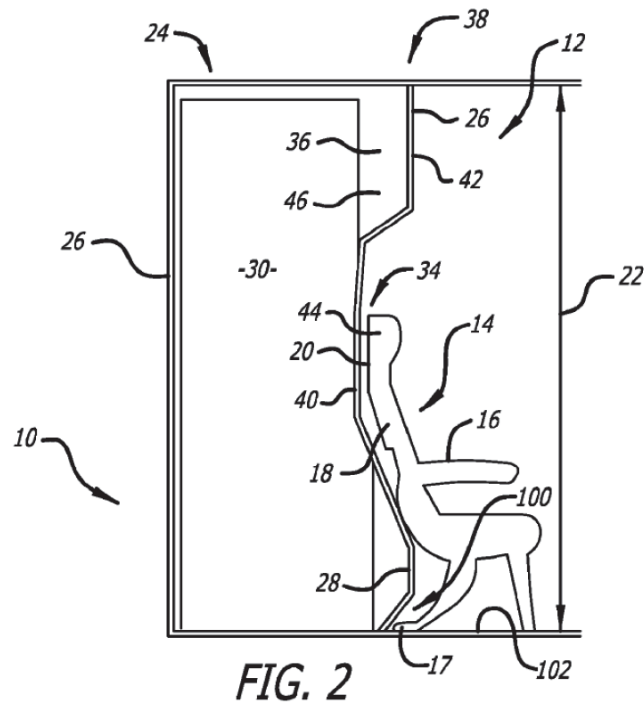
, reproduced above, illustrates enclosure 10, such as a lavatory, positioned aft of aircraft cabin 12. Ex. 1001, 4:1-3, 4:8-13. The lavatory has walls that define interior lavatory space 30. *Id.* at 4:15-24. Forward wall 28 of the lavatory is described as “substantially not flat in a vertical plane” and “disposed immediately aft of and adjacent to or abutting the exterior aft surface of” passenger seat 16. *Id.* at 4:15-24. In particular, the forward wall is shaped to provide recess 34, which accommodates the partially-reclined backrest of the passenger seat, as shown in Figure 2. *Id.* at 4:24-28. In addition, the forward wall is shaped to also provide second, lower recess 100, which accommodates “at least a portion of an aft-extending seat support 17.” *Id.* at 4:31-36.
